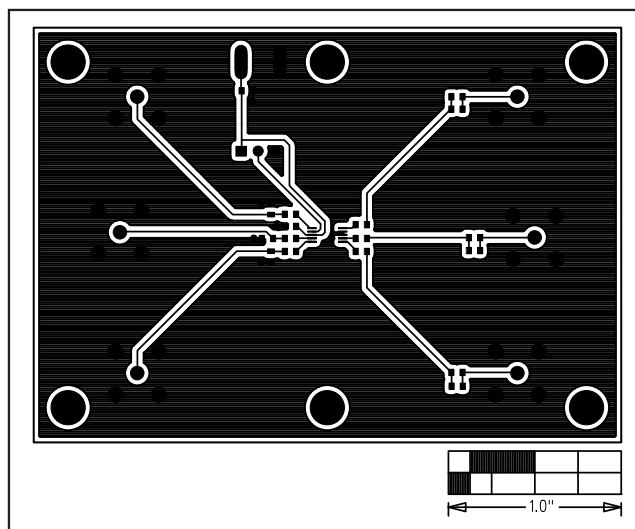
MAX9653 EV Kit PCB Layout—Component Side
